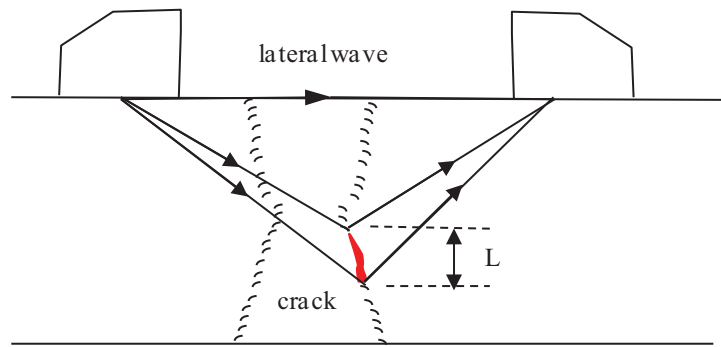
A typical inspection geometry for measuring the size of a crack in a weld with the TOFD method.
